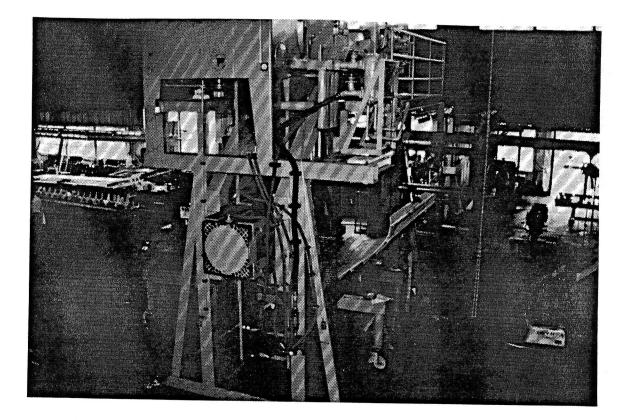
Bump Press used to Flatten the Cylindrical Extrusions
